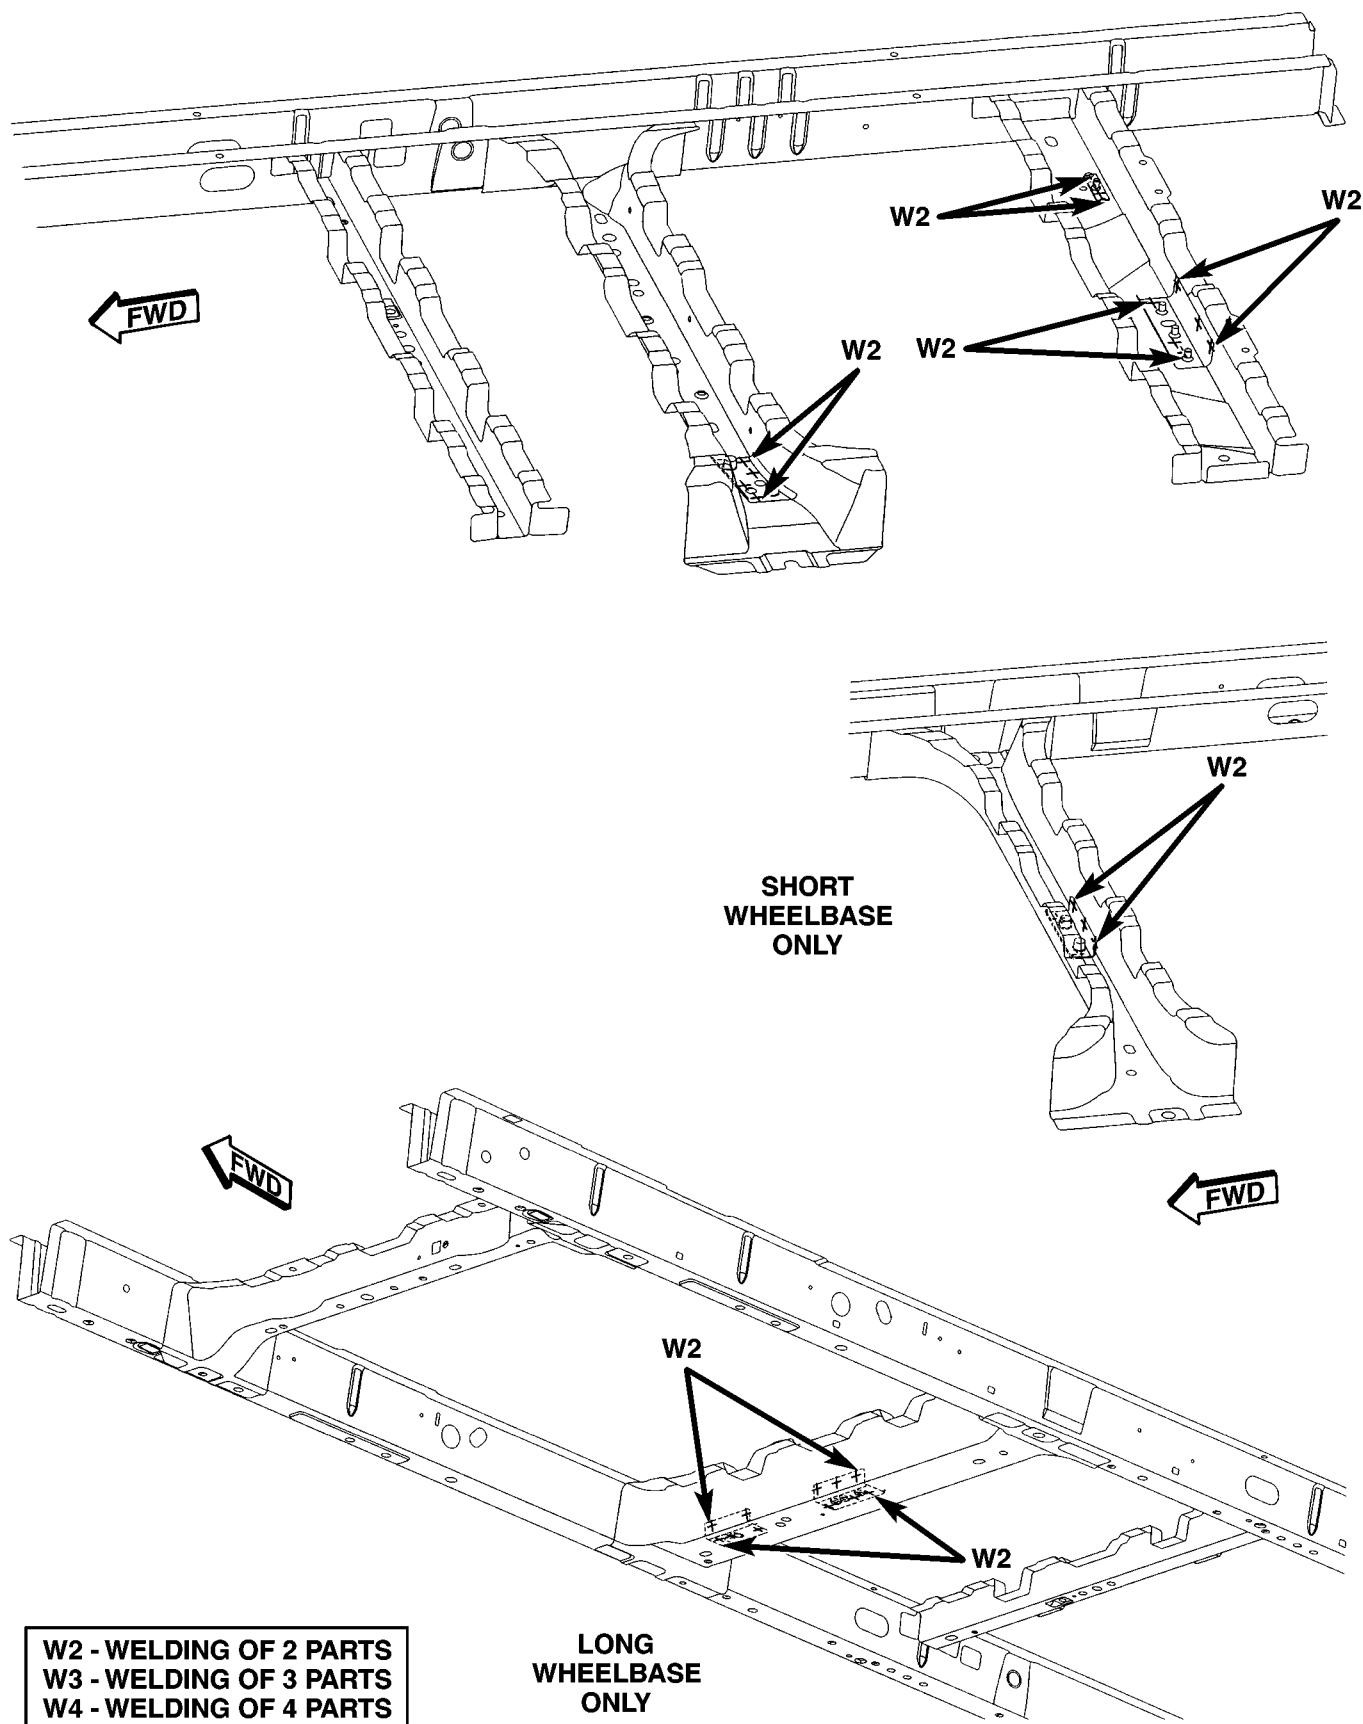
FLOOR PAN CROSS MEMBER REINFORCEMENTS
